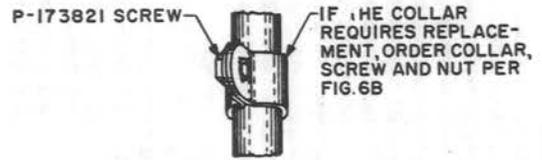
A - Brush Rod Upstop Collar Equipped With Clamping Screw
